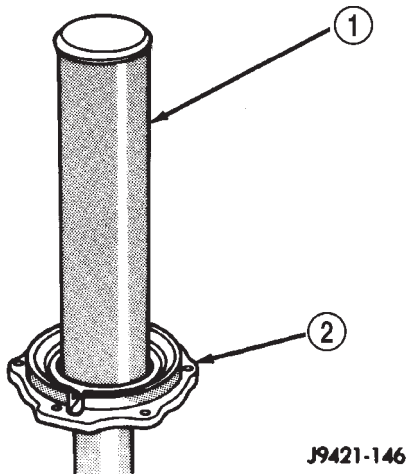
Installing Oil Seal In Front Bearing Retainer
